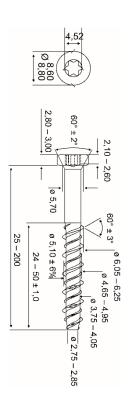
Milletech Itech 6,1 T25 for fixing in concrete
